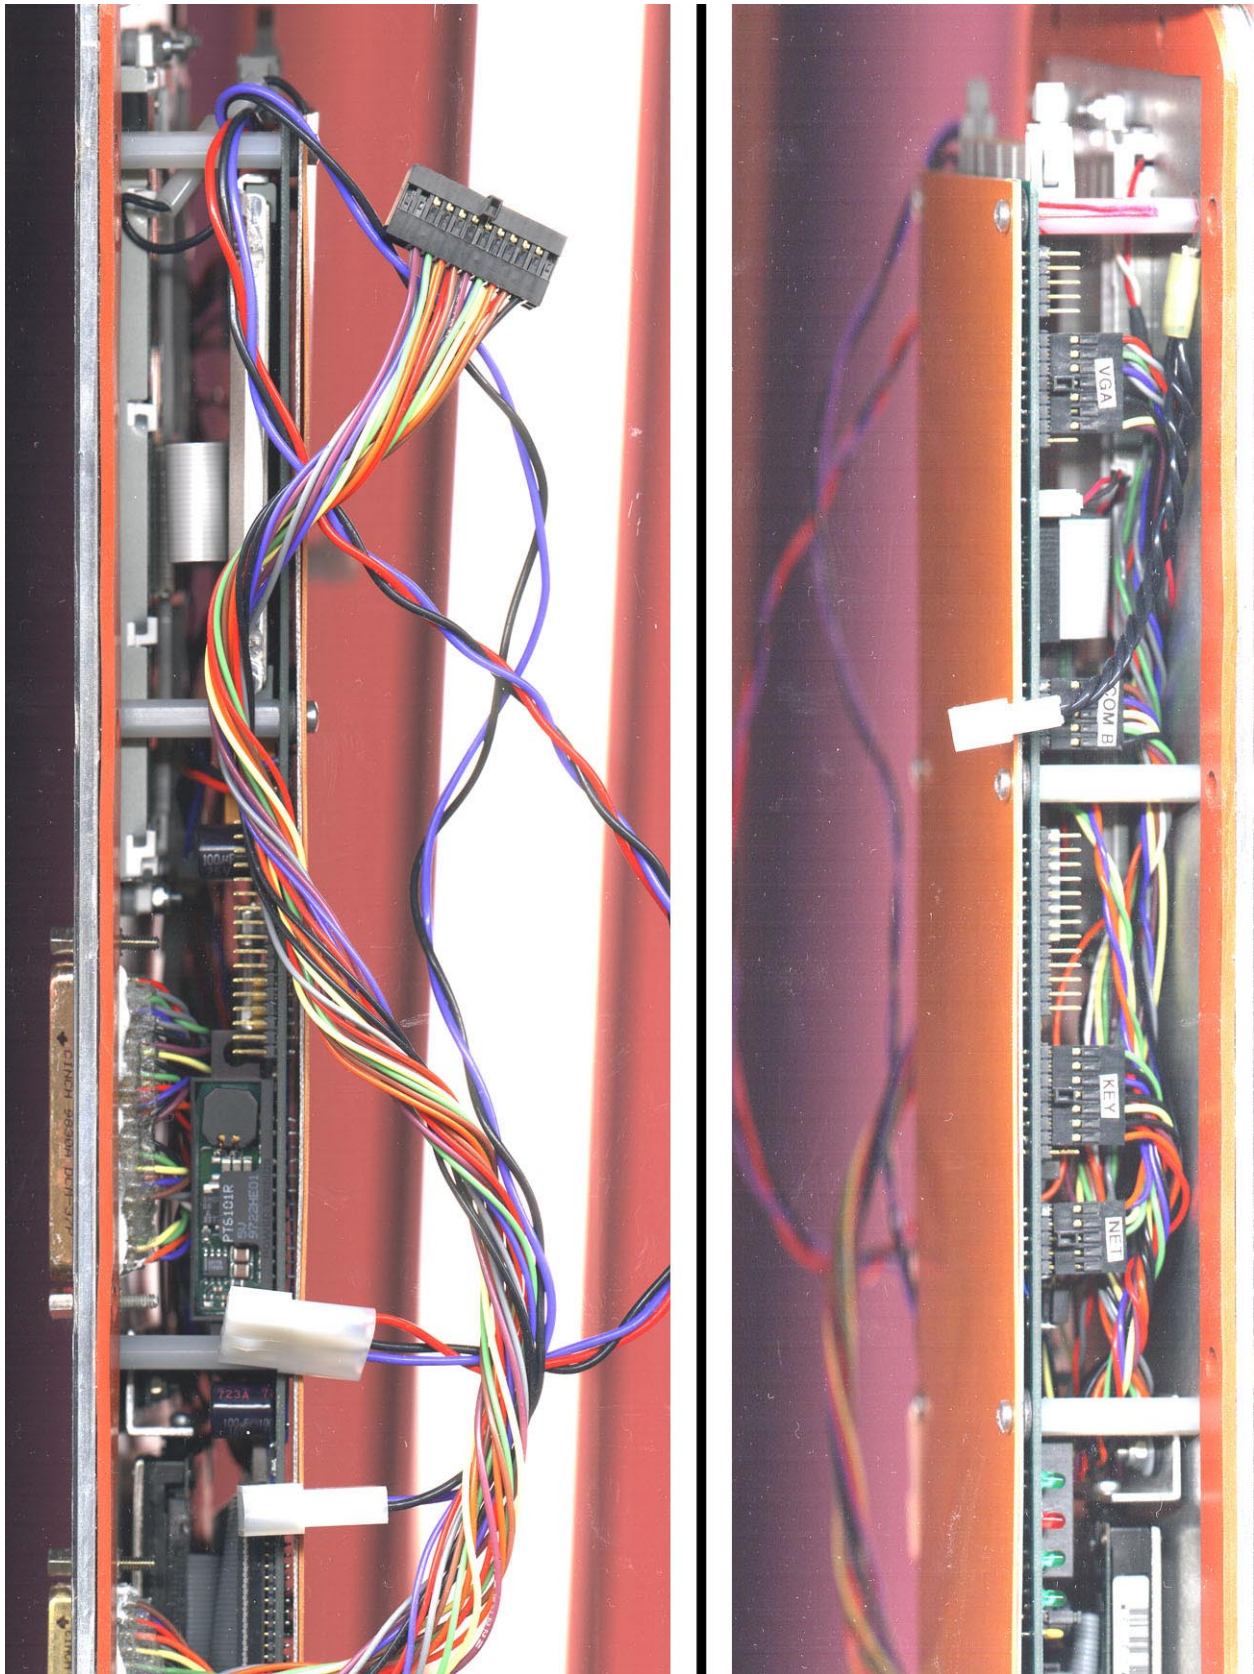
Photo of Front Panel Assembly – (b) Back Side, (c) Front Side
